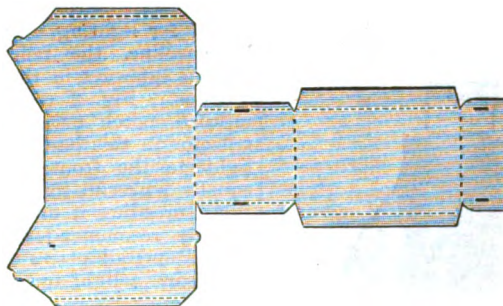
Single-Piece Bucket Before it is Formed into the Shape Shown in Fig. 3.
